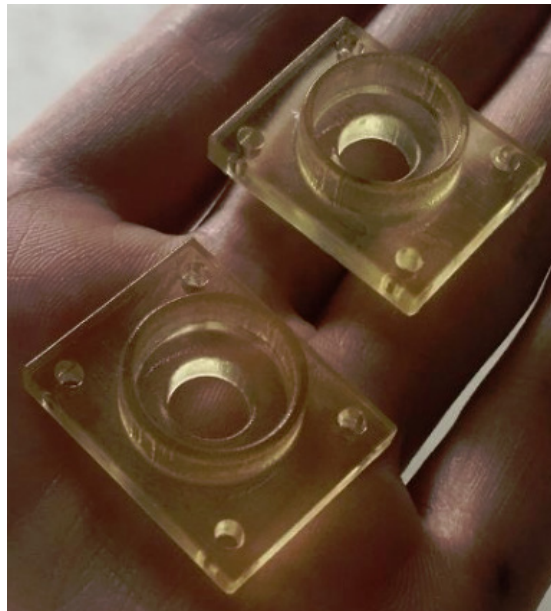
Vertical shaft supports made using 3D printed resin cured with UV light.
